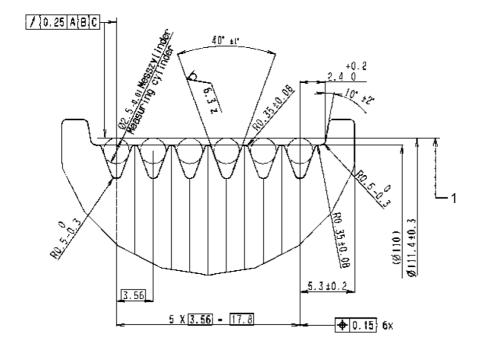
Detail U - refrigerant compressor drive pulley, pulley diameter 110 mm
